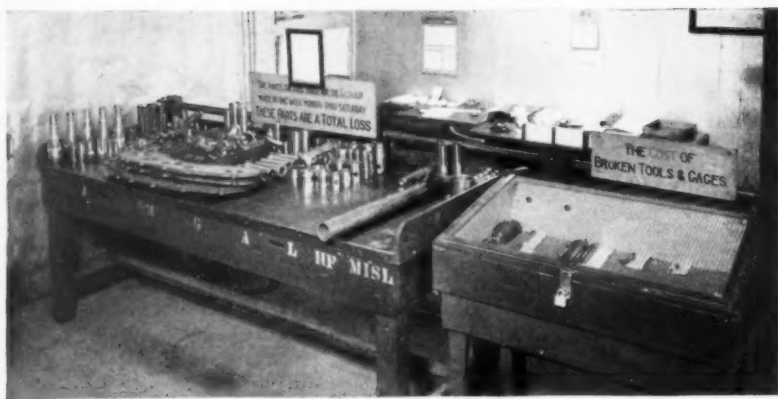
Benches in main shop aisle where production parts and scrapped tools are displayed daily. This exhibit is responsible for drastically reducing tool breakage and scrap. If the exhibit were to be discontinued for a month, management believes broken tools and scrap would increase.
